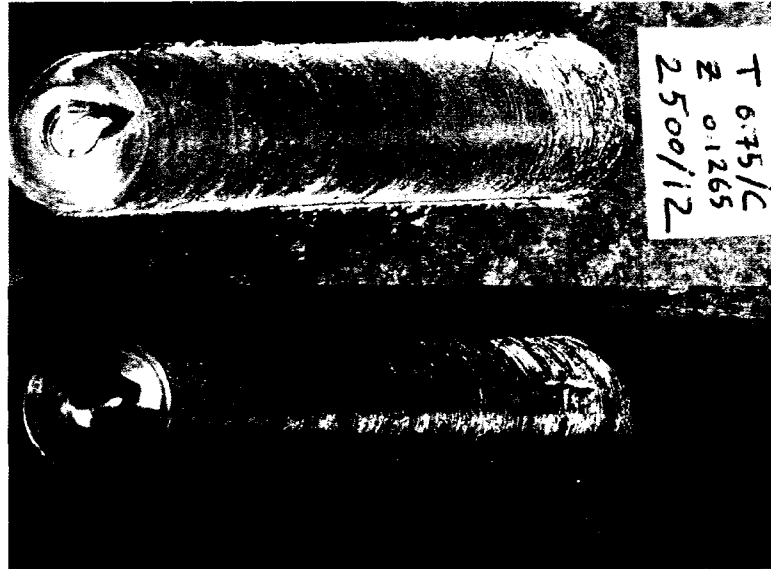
11 Mg AZ31B-O samples processed at a) 2500 rpm and 12.0 in. /min., and b) 1750 rpm and 12.0 in. /min. (Tool is 0.75" shoulder diameter, flat pin and concave shoulder).
